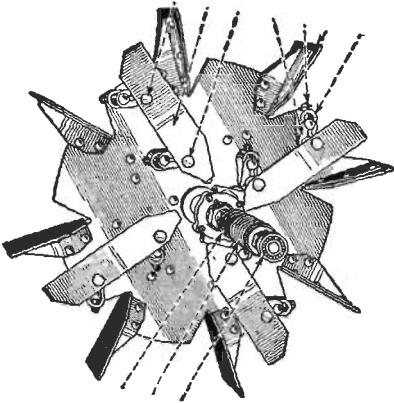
Flywheel cutter head showing knives and fan blades.
